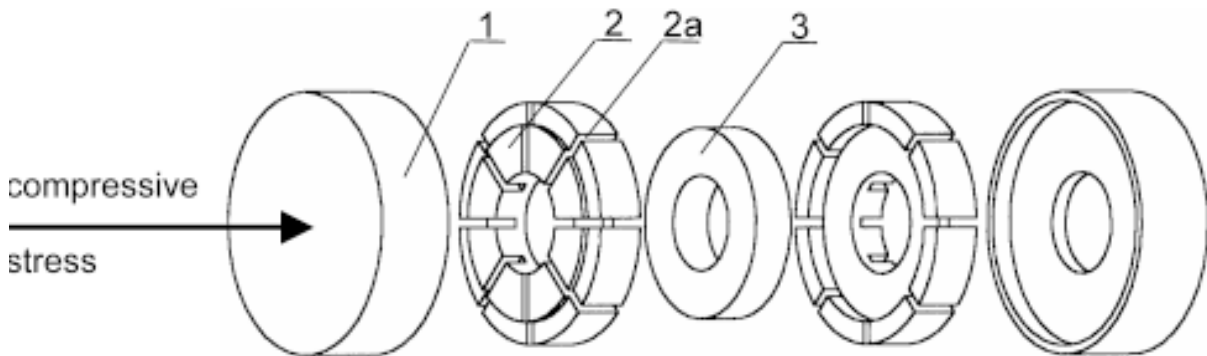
Device for application of the uniform compressive stress to the ring-shaped sensing element (Patent pending P-345758) 1 – base backings, 2 – nonmagnetic cylindrical backings, 2a – grooves or the winding, 3 – core under investigation.
